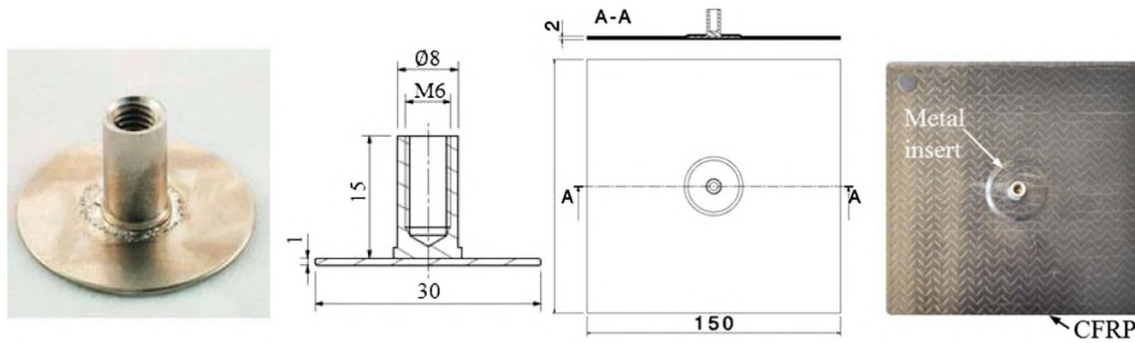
Photograph and dimensions of the metal inserts and CFRP specimens [9]
